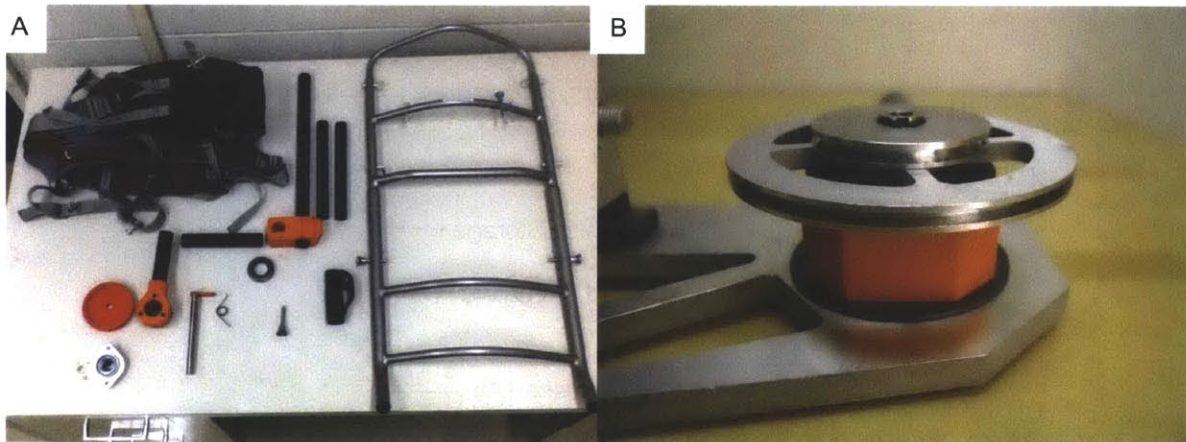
(A) Some prototype components ready to be assembled.(B) The assembly of the prototype spool.
